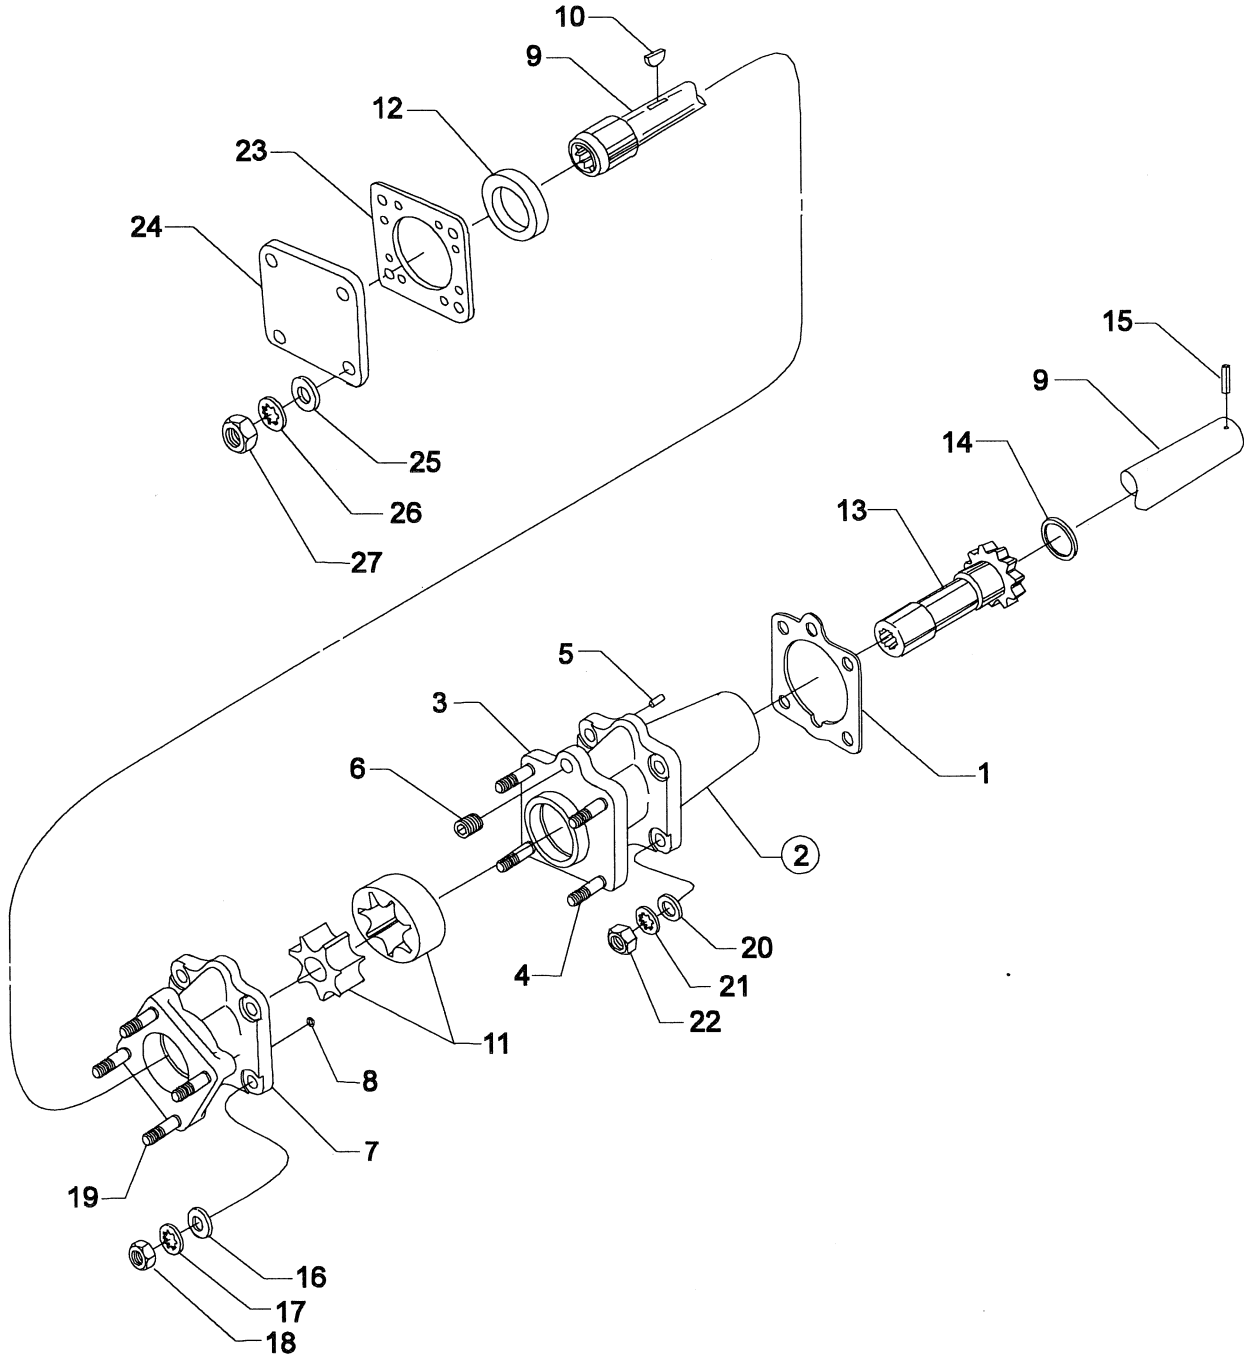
TURBO SCAVENGE PUMP AND HYDRAULIC PUMP DRIVE AND COVER
